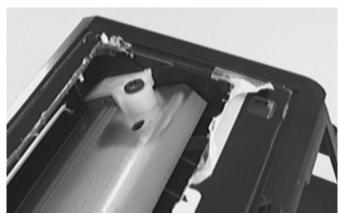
Cut-out in toner-cartridge cover to access mounting screws.
